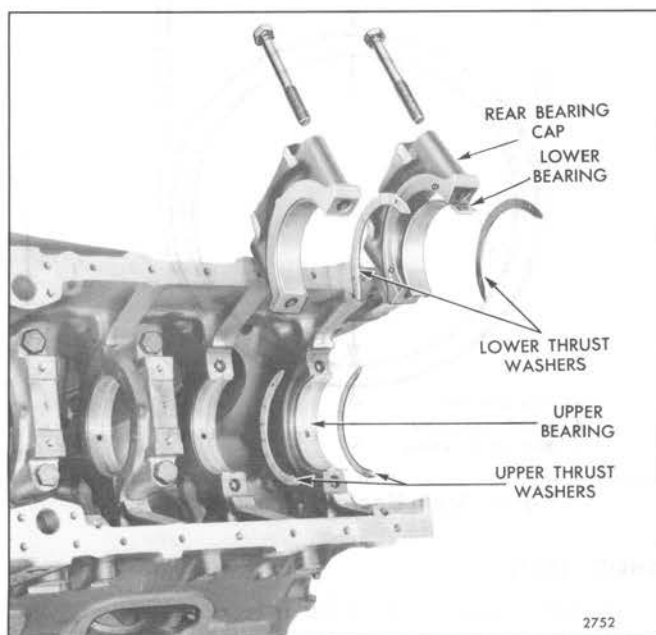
Main Bearing Shells, Bearing Caps and Crankshaft Thrust Washers
